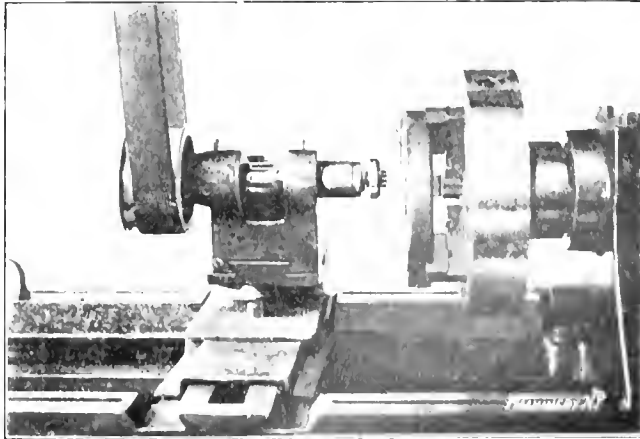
Milling Friction Bands on Counter-shafts in the Lathe
